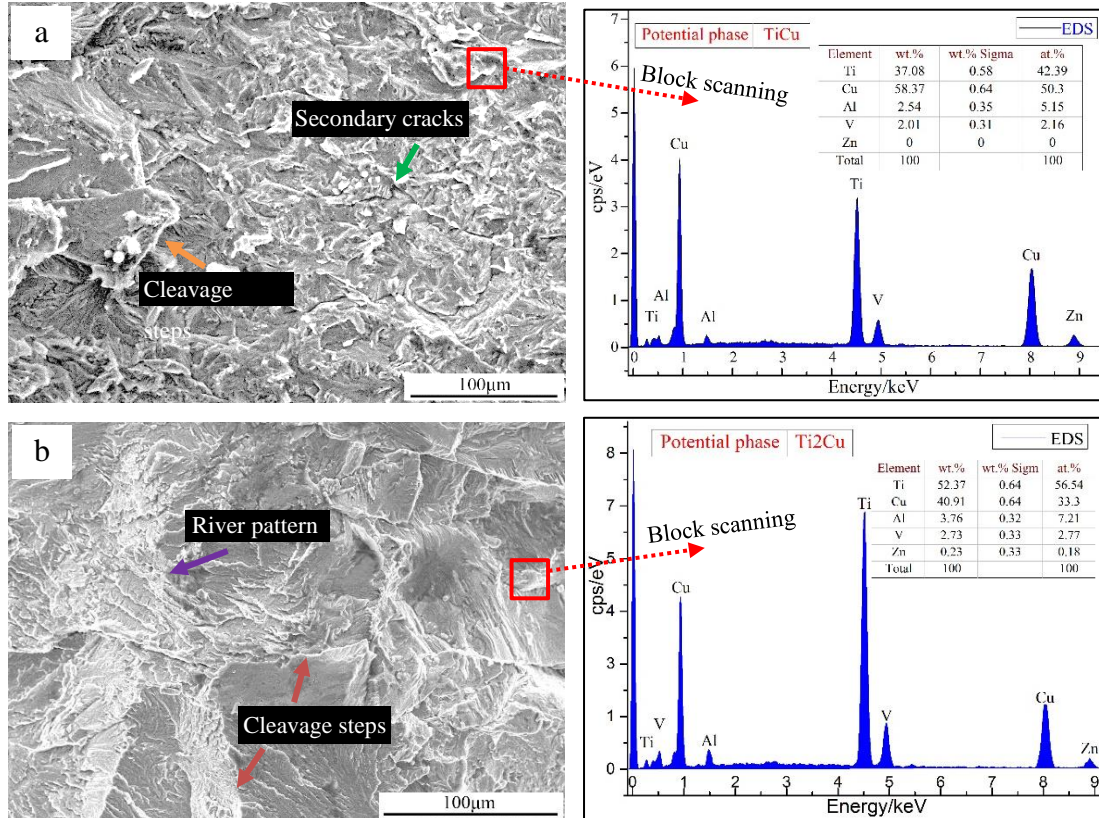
Fracture morphologies of joints of welding-brazing and adjacent welding: (a) joint of welding-brazing with small crystal facet characteristic and (b) joint of adjacent welding with river pattern.
